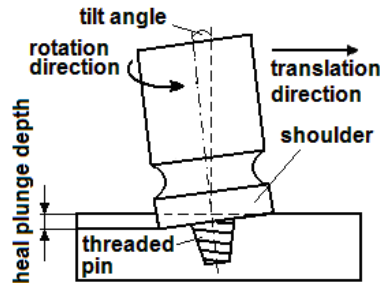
The shape and the movements of the friction stir welding tool
